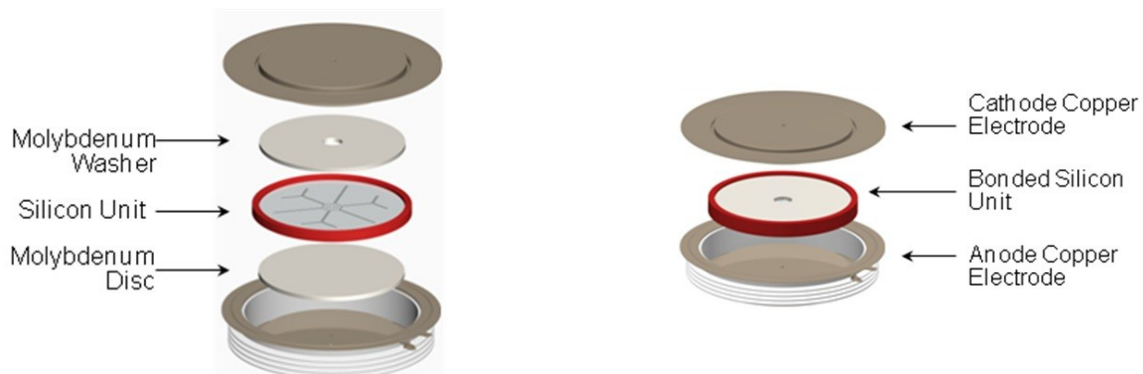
125mm, 8.5 kV PCT assembly for (a) pressure contact (b) bonded silicon technology
